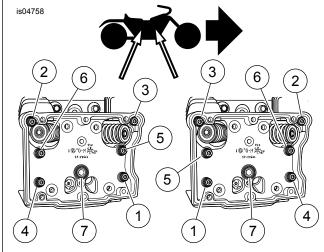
Rocker Housing Gasket Installation (Rear Cylinder Shown)
